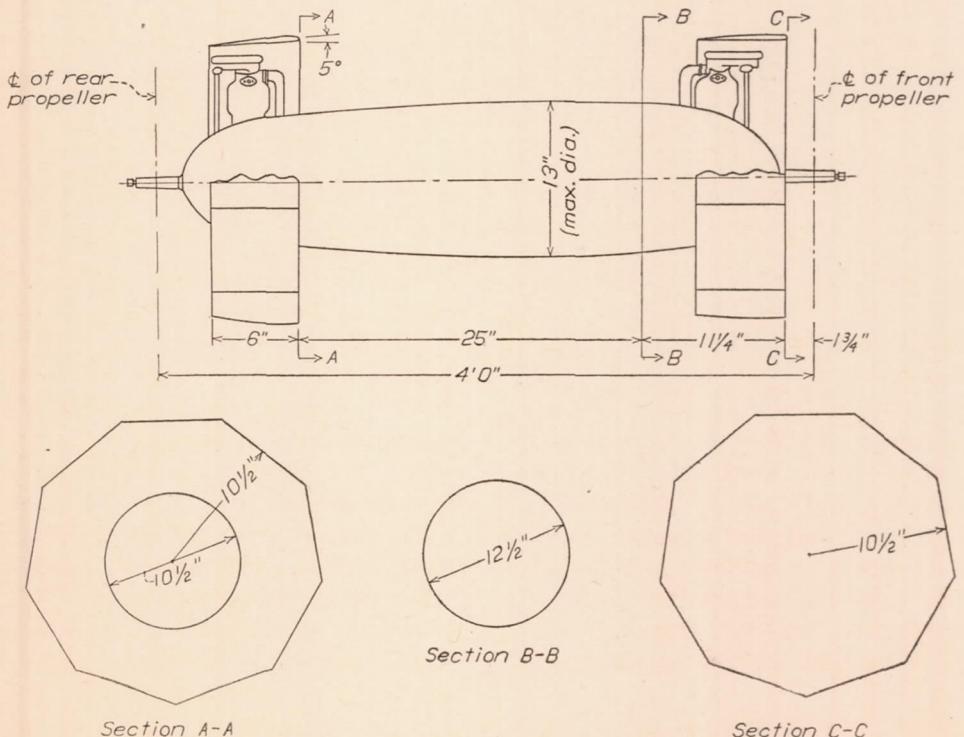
Small nacelle and engine assembly, propeller spacing 1 diameter.
